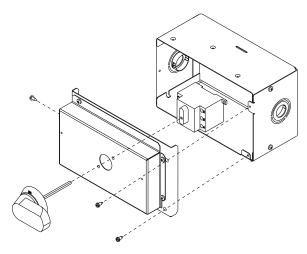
Handle and Shaft Assembly for NFD (Sizes 08-14)
